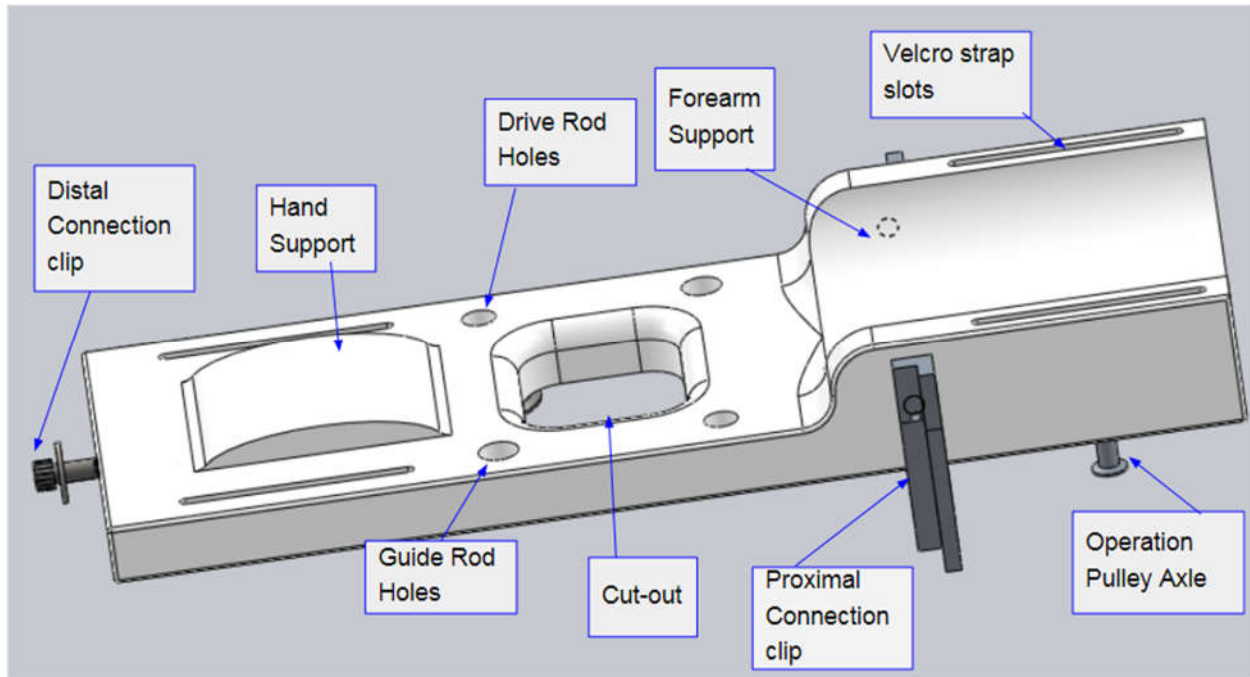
Isometric view of the base as a subassembly with associated parts
